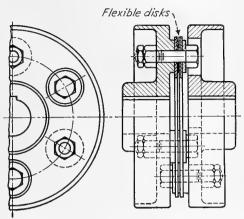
A coupling made by Aldrich Pump Company, similar to Fig. 268, except that bolts are used instead of pins. This coupling permits only slight endwise movement of the shaft and allows machines to be temporarily disconnected without disturbing the flanges. Driving and driven members are flanged for protection against projecting bolts.
